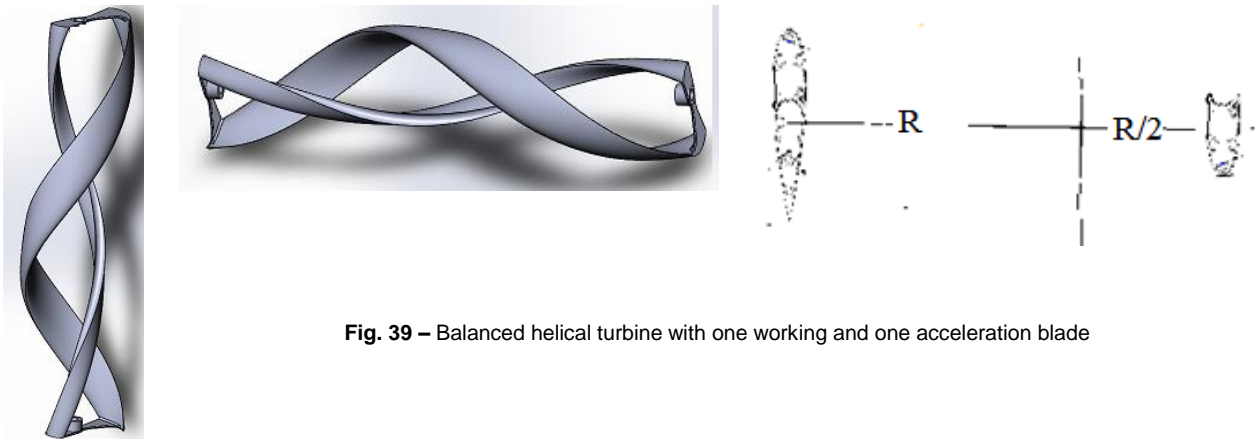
Balanced helical turbine with one working and one acceleration blade
